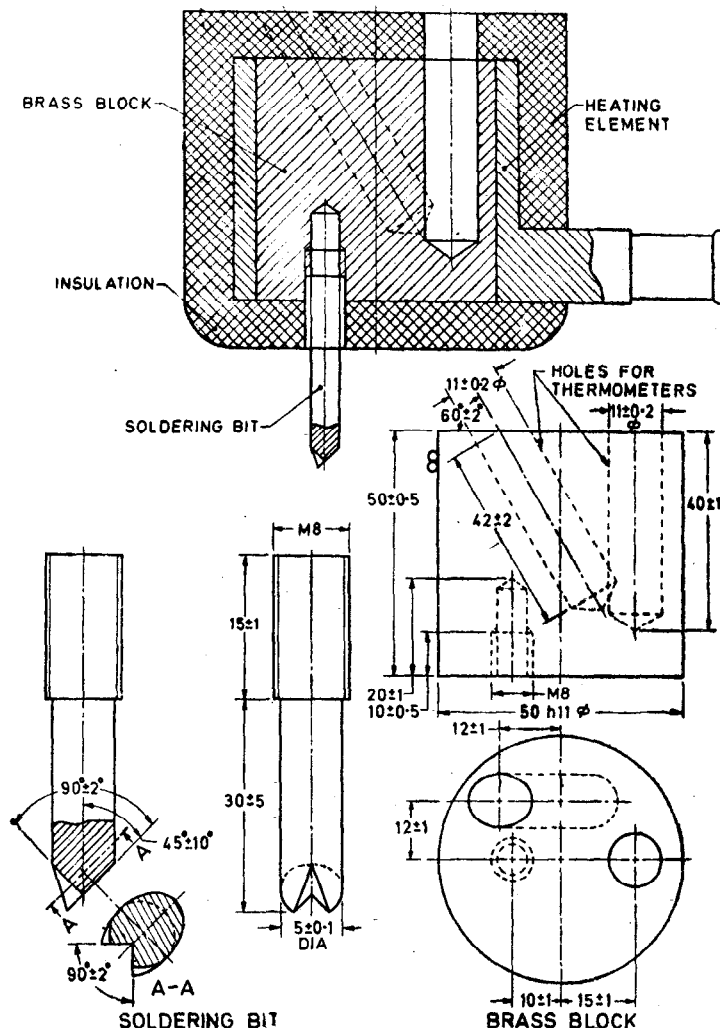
EXAMPLE OF A SOLDERING TOOL
